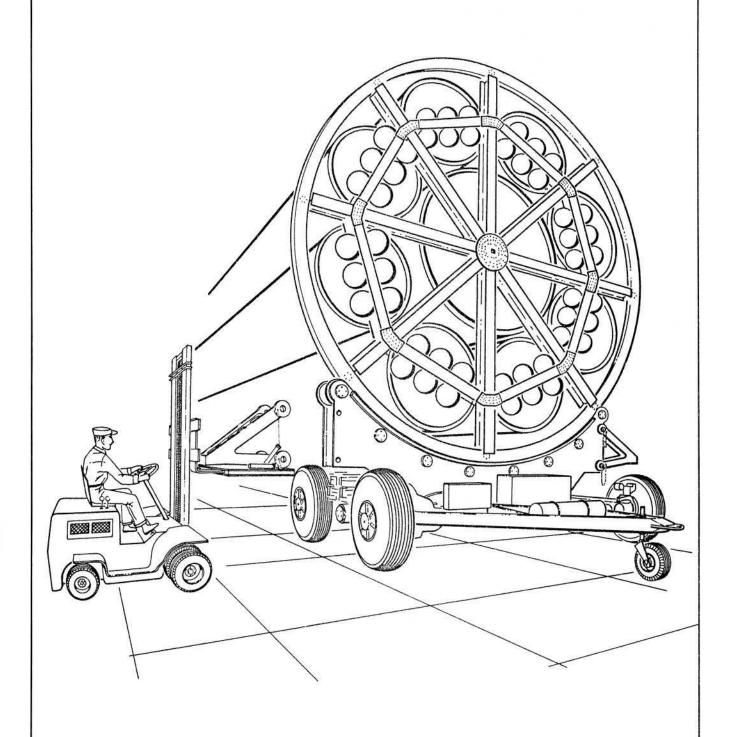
ATTACHING JACK PAD ASSEMBLY
